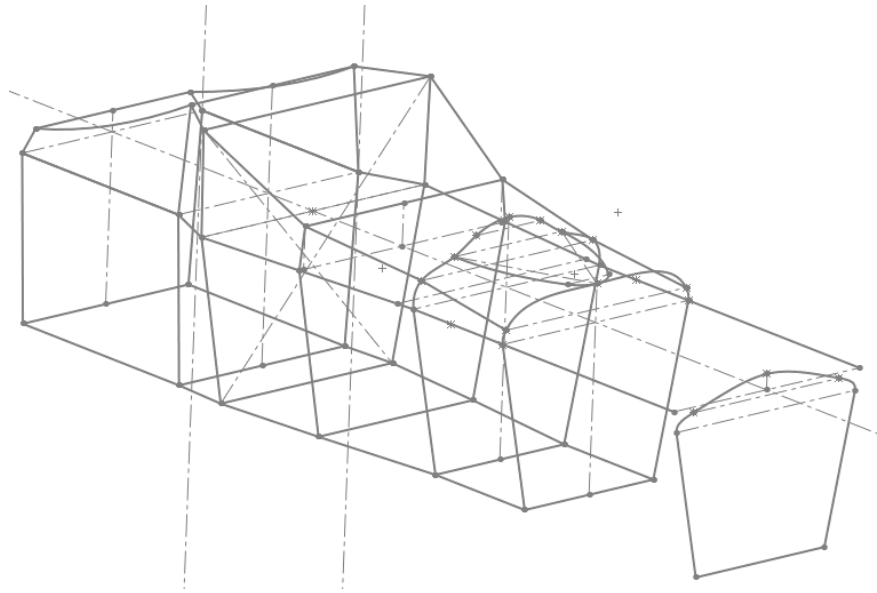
Preliminary chassis guide sketches including parting mold lines, template cross-sections, and rear bulkhead geometry.
